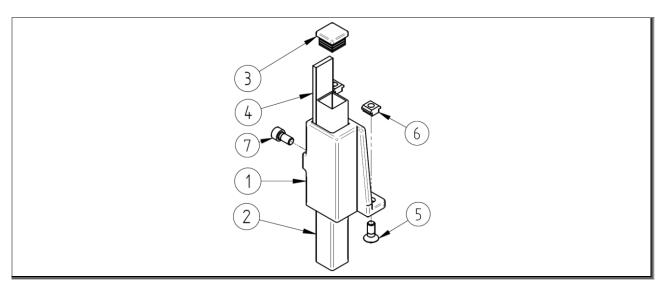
Parts list: Conveyor support IK1 U.800.0182.00
